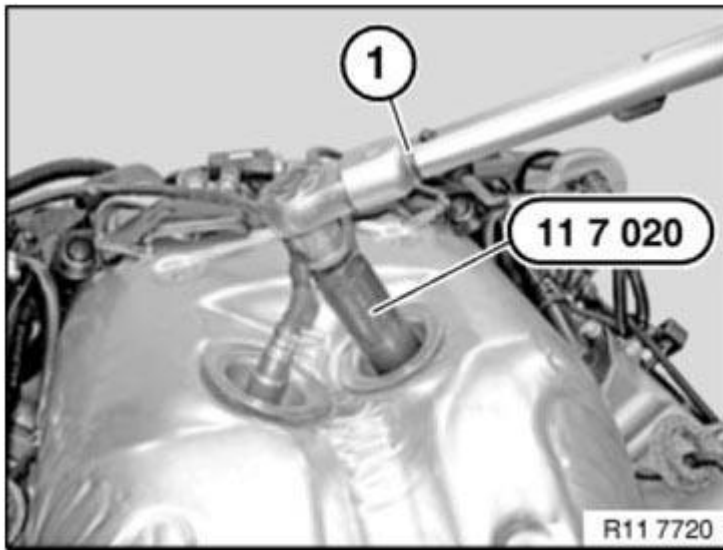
Releasing Control Sensor Using Special Tool 11 7 020
